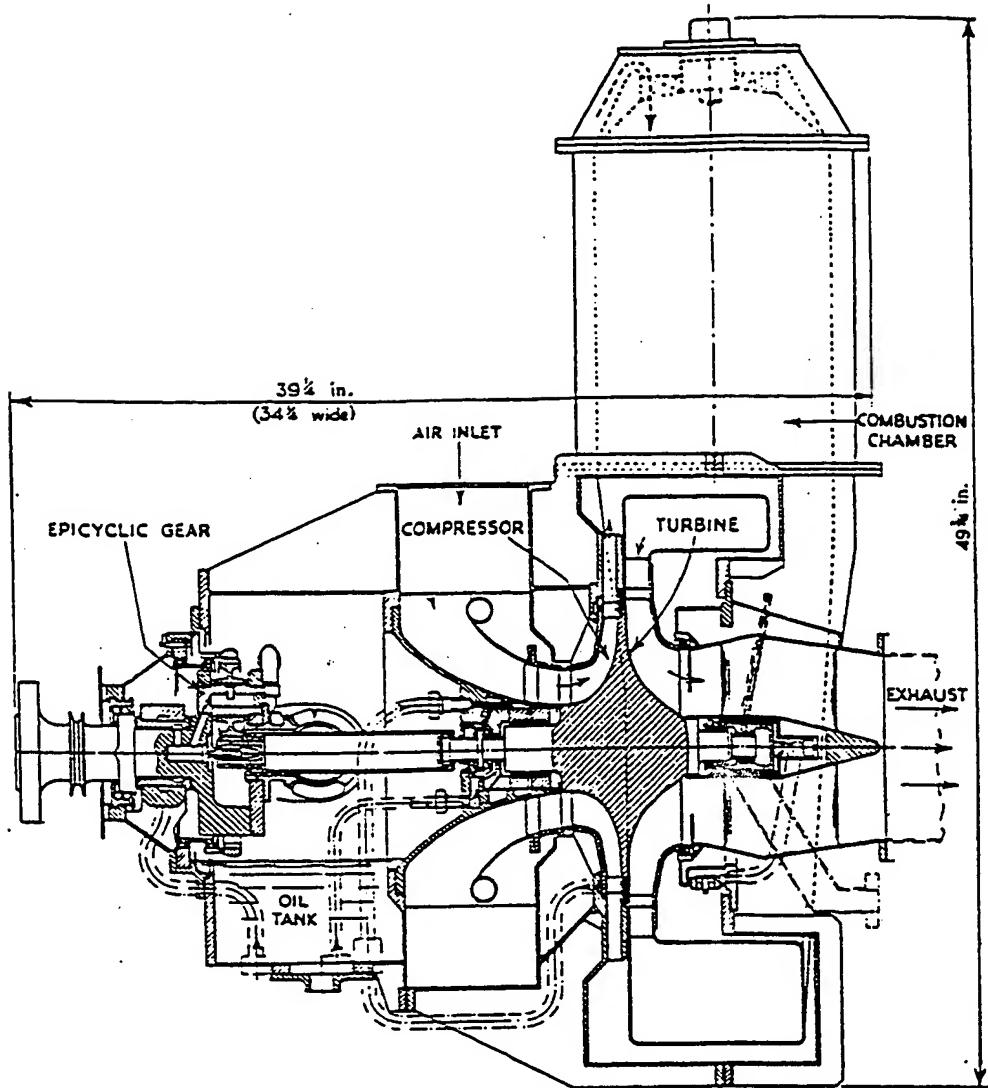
Sectional arrangement of Allen 125 kW gas turbine
